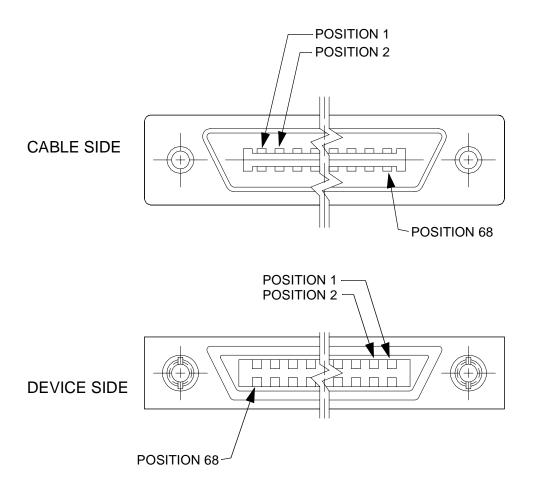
68-contact alternative 4 shielded contact positions (P cable)
